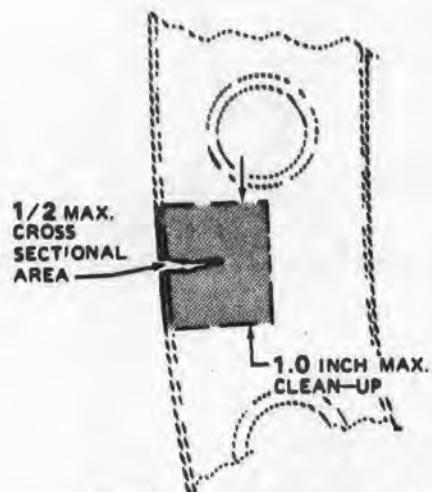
Typical bulkhead damage limits (Sheet 1 of 2)
